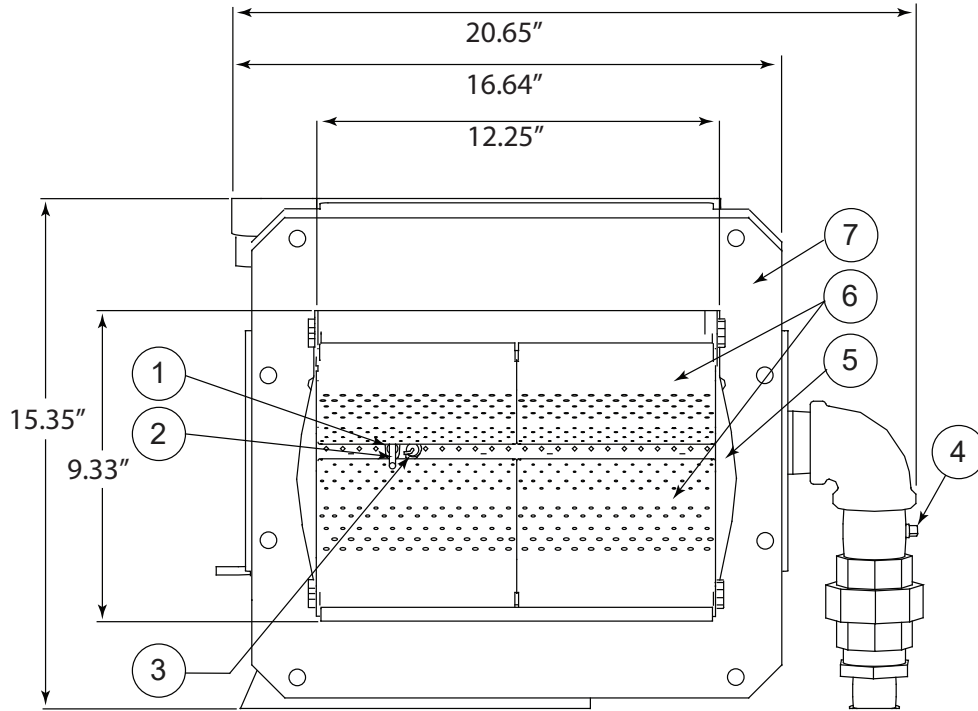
Internal View of Burner Housing Front - 24V Burner
